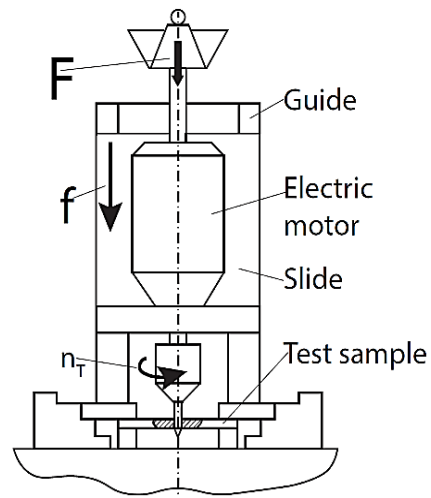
Friction drilling device that considers the use of a bench drilling machine
